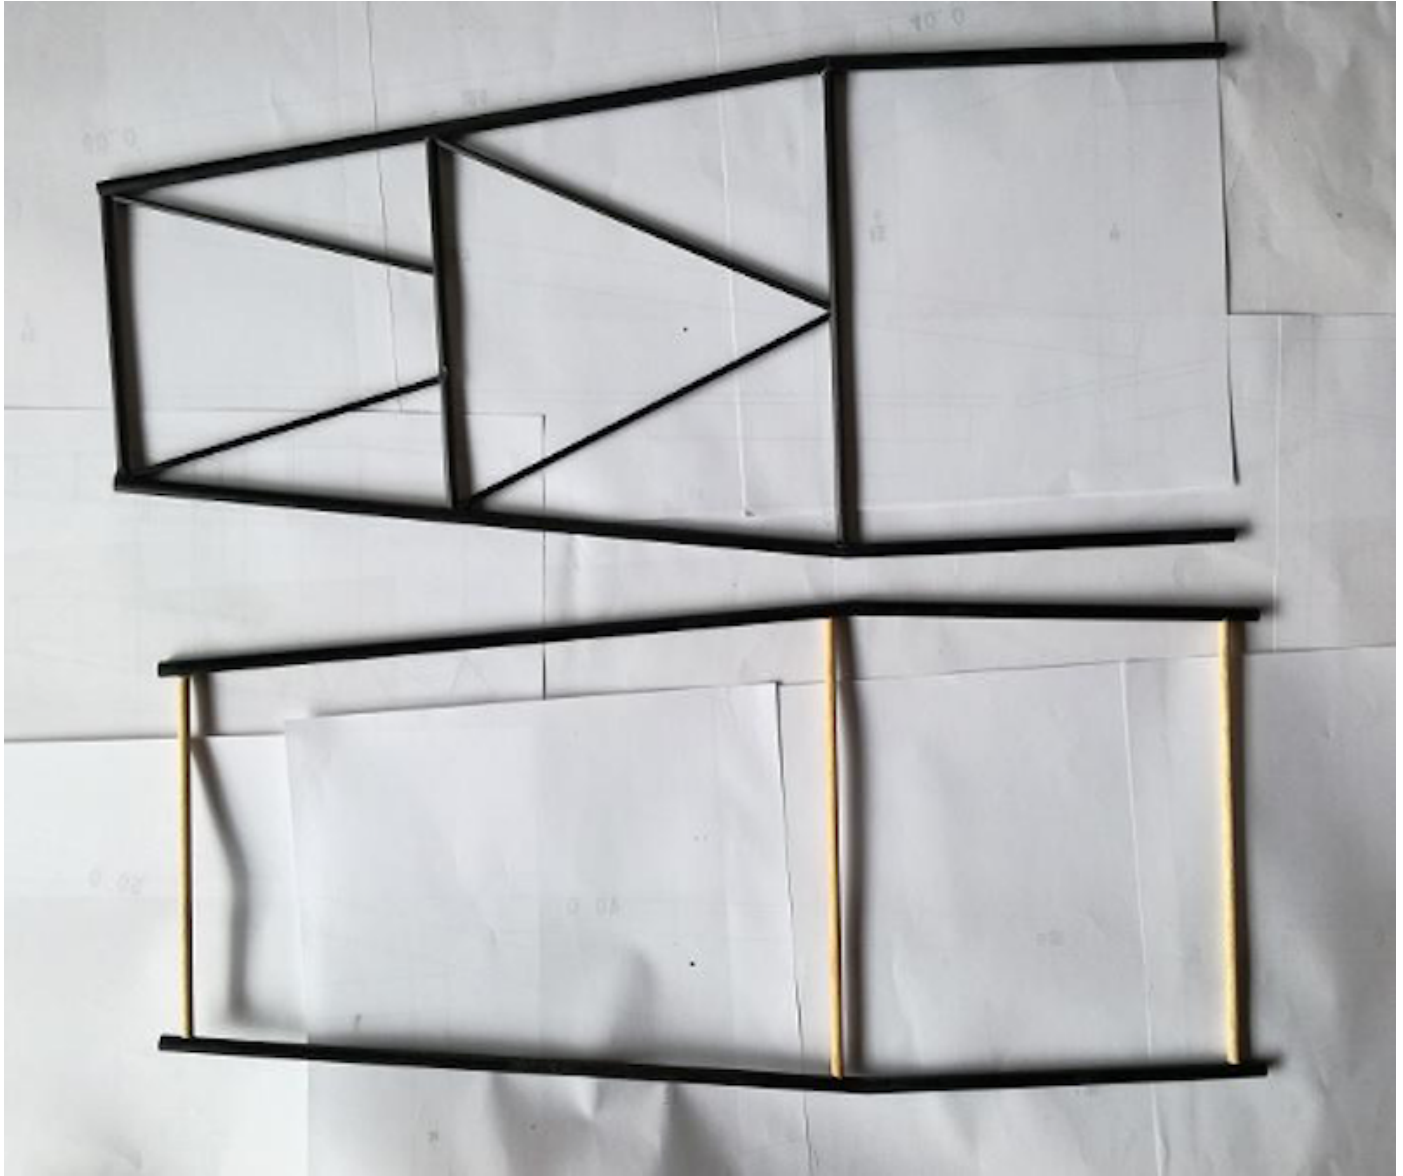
Cockpit floor structure (top) and canopy sill (bottom).
